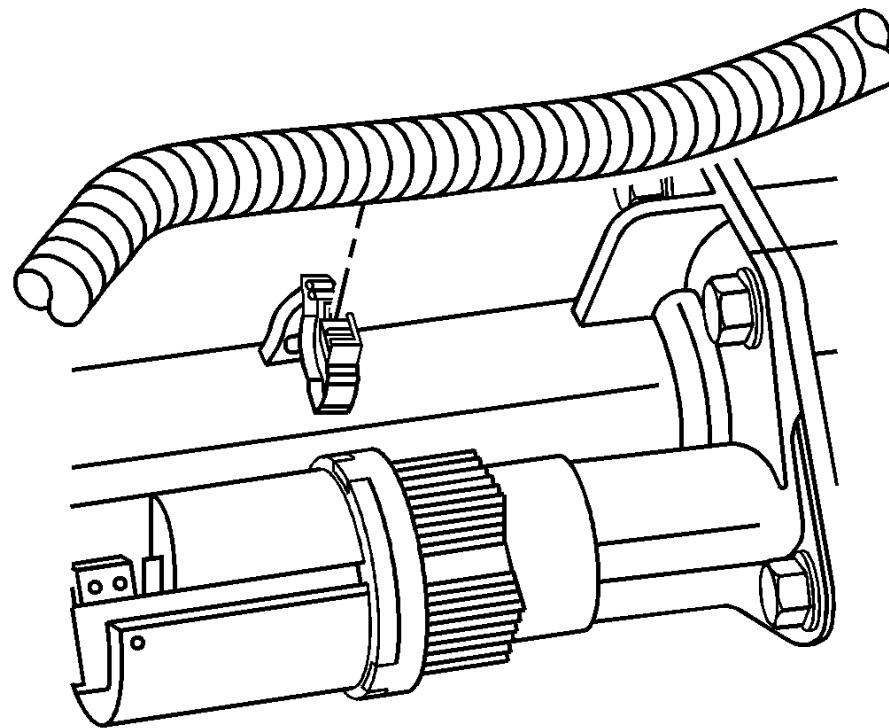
Disconnecting Wire Harness From Inner Axle Shaft Housing (S4WD Axle Only)
